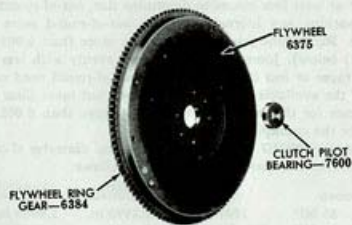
Flywheel and Clutch Pilot Bearing (Truck)
